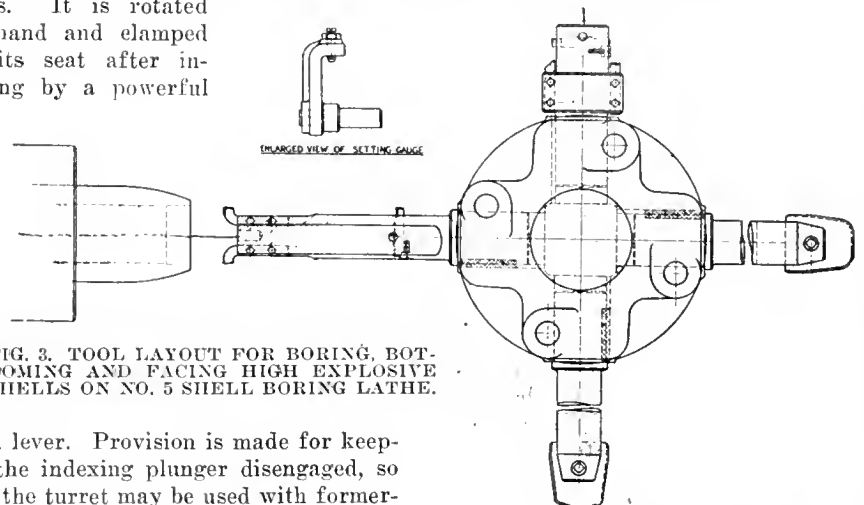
TOOL LAYOUT FOR BORING, BOTTOMING AND FACING HIGH EXPLOSIVE SHELLS ON NO. 5 SHELL BORING LATHE.
